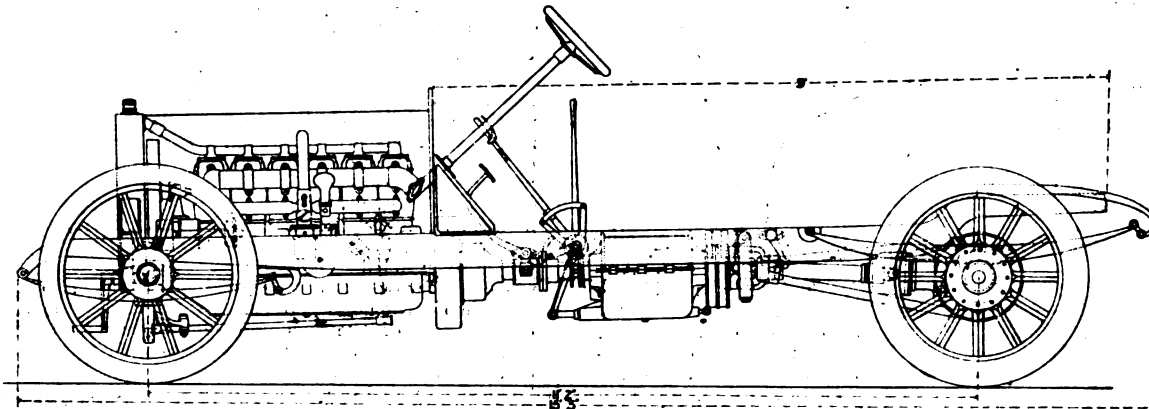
Chassis of Germain Six-Cylinder Car.
